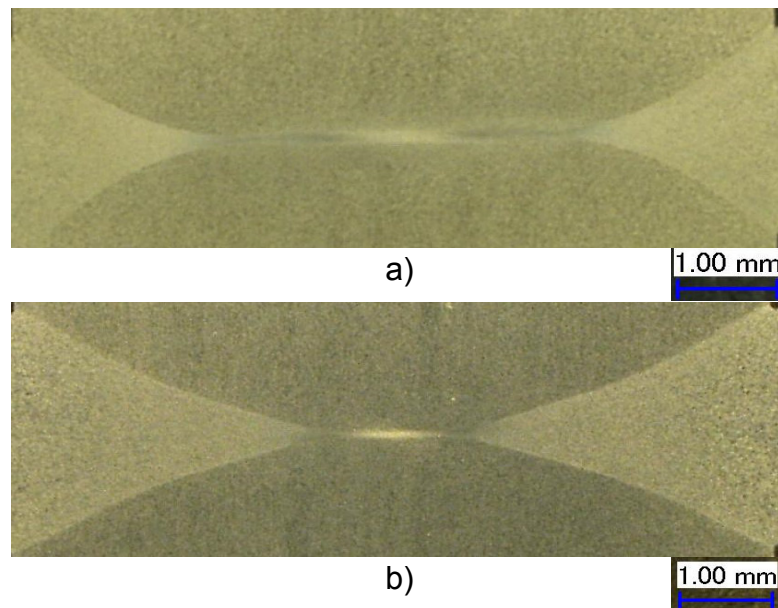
The weld geometry of a) Exp. 21 b) Exp. 16.
